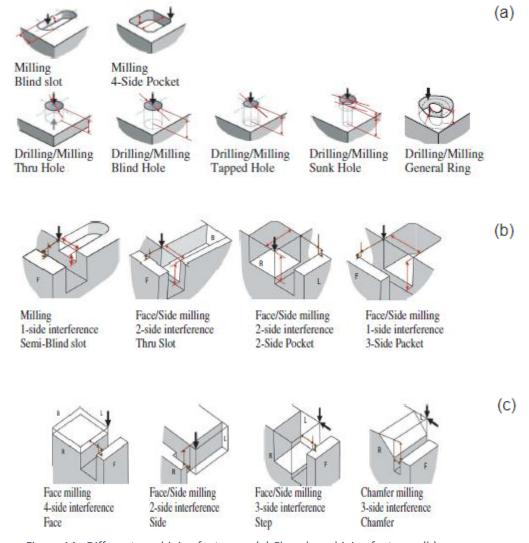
Different machining features – (a) Closed machining features; (b) – Semi-closed machining features; (c) – open machining features (Ji et al., 2018)
